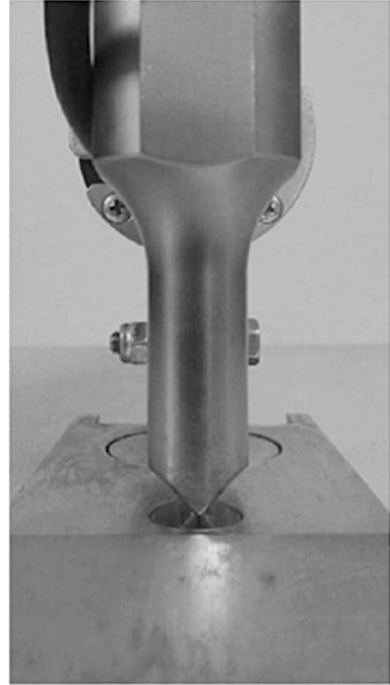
Rotating demonstrator I preform without secured cutting edges [6]
